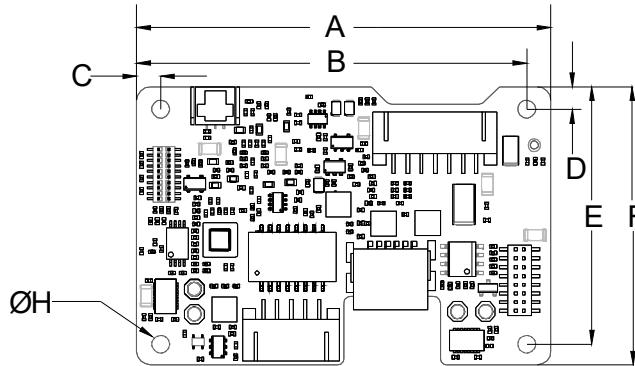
XETK-S21.0 Dimensions - Top View
